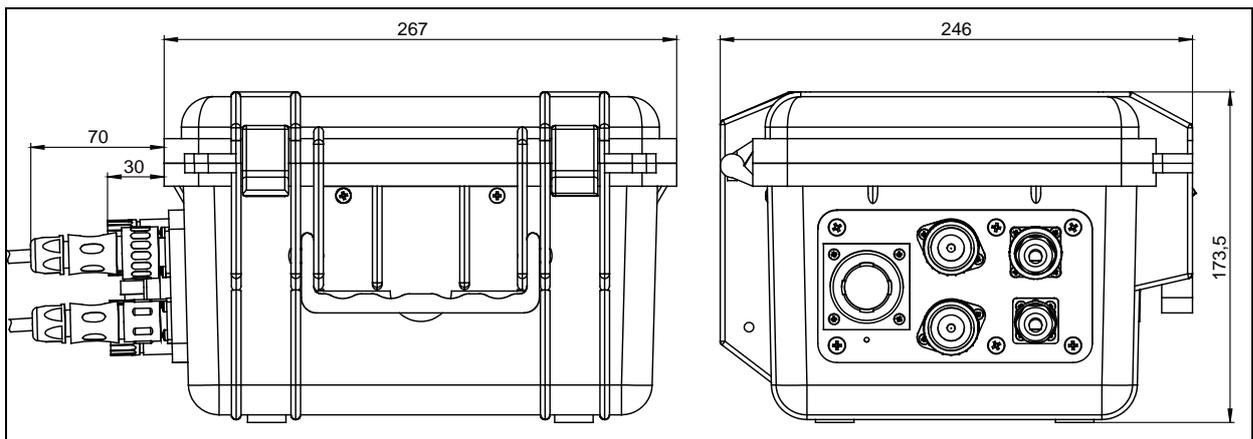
PCM 4 enclosure dimensions and connection sockets
